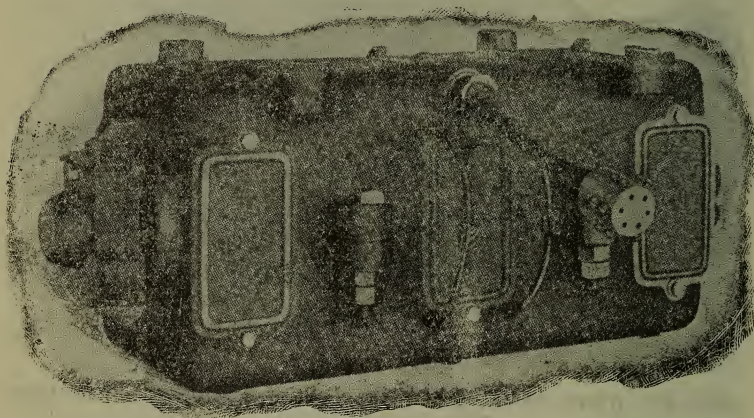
SIDE VIEW OF BUCKER SHOWING COUPLER HEAD.
